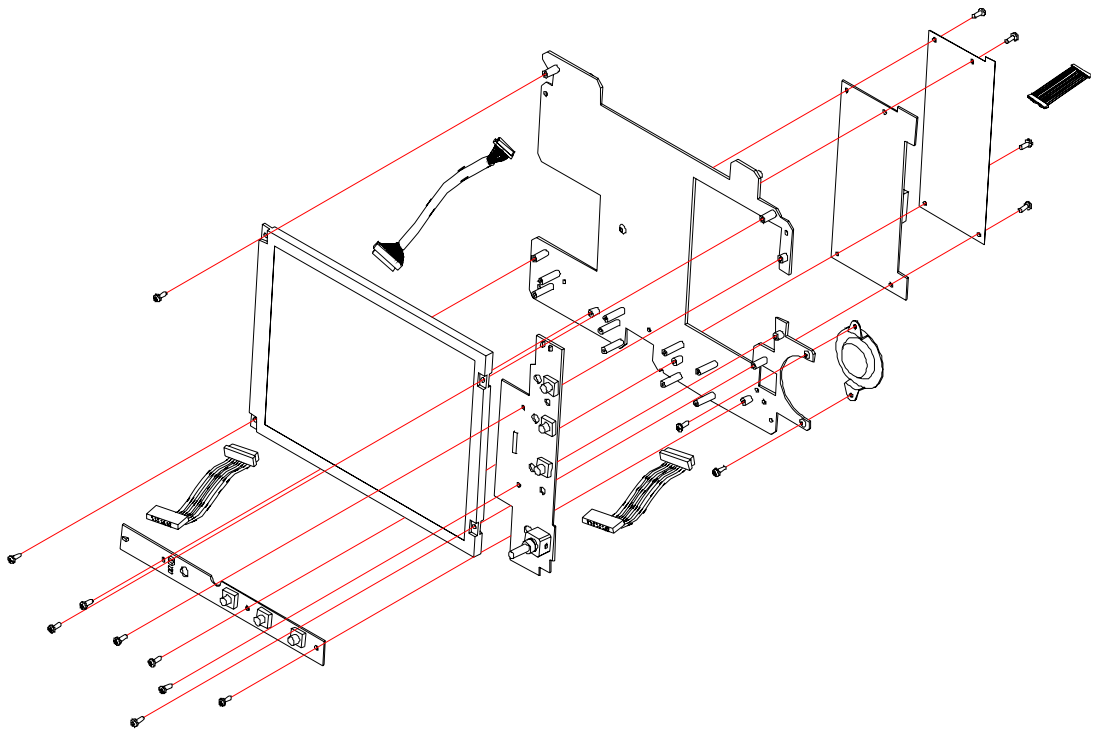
Front Case Disassembly – LCD, Insulation, Inverter Board, Front Key Board, Side Key Board, Speaker
